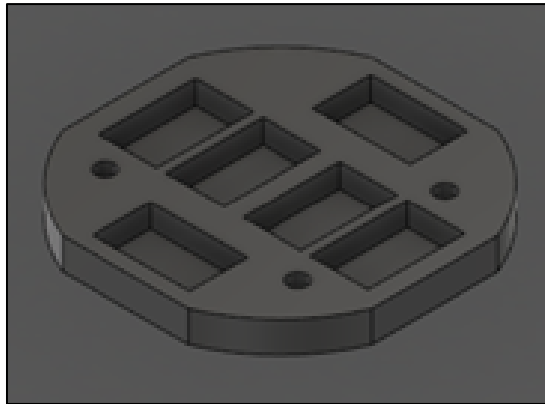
Render of ballast system (section two, 3rd through 11th layers).
